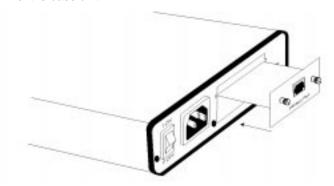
Installating the Model IM 1/J Plug-in Serial Interface Module
